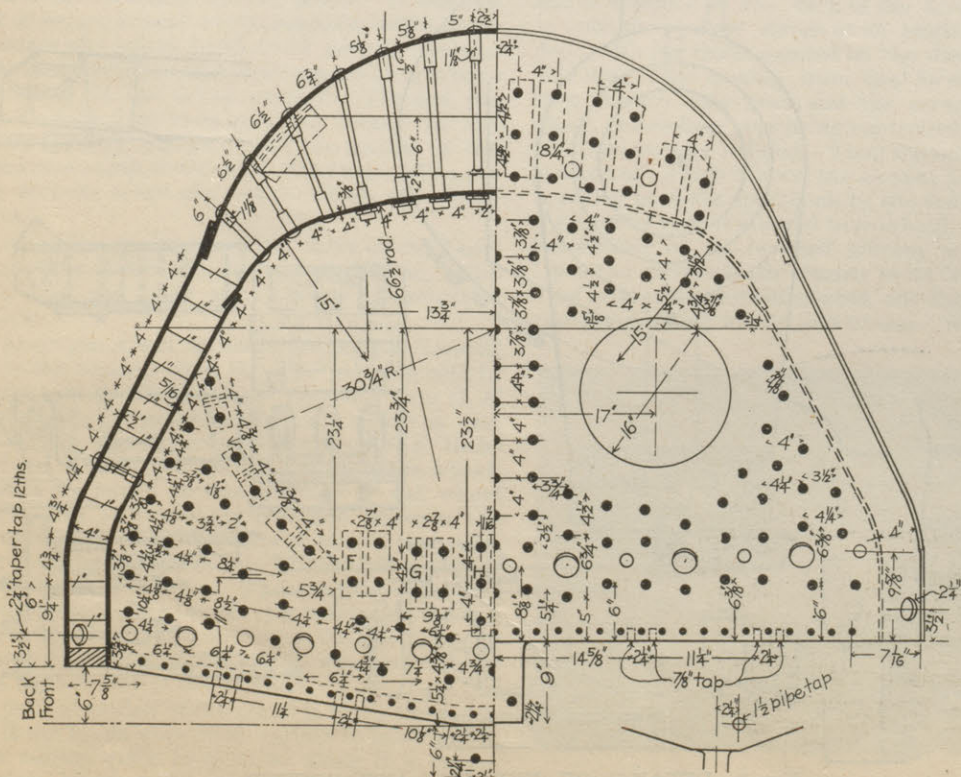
HALF SECTION AND HALF ELEVATION OF FIRE-BOX.
